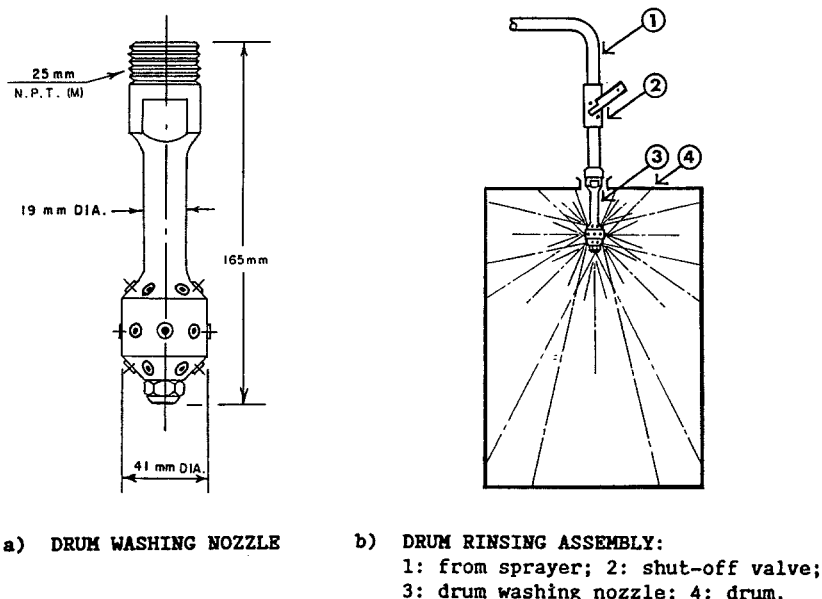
DRUM RINSING ASSEMBLY AND NOZZLE DETAIL
